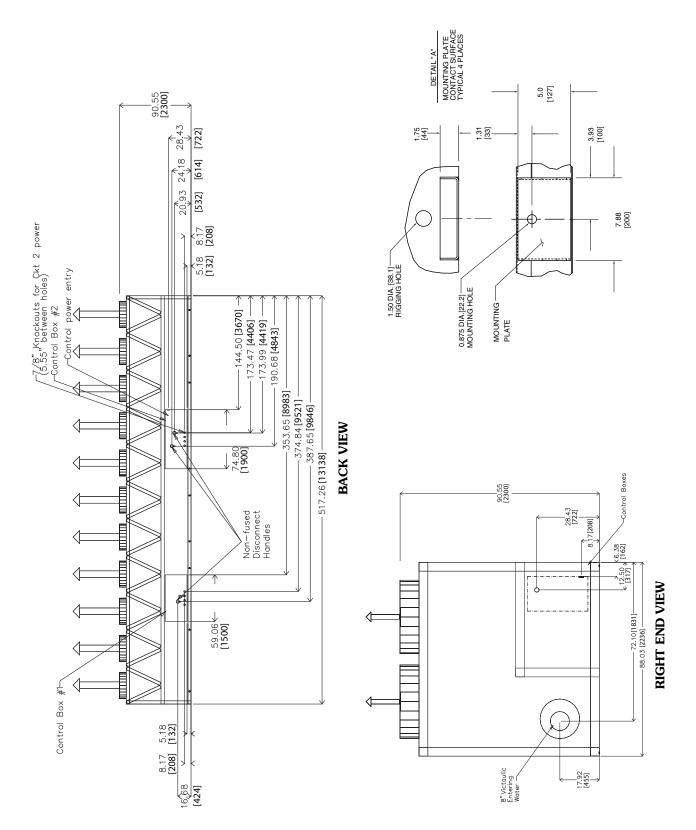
30XA450,500 Air-Cooled Liquid Chiller with Single Point Connections Dimensions (cont)
